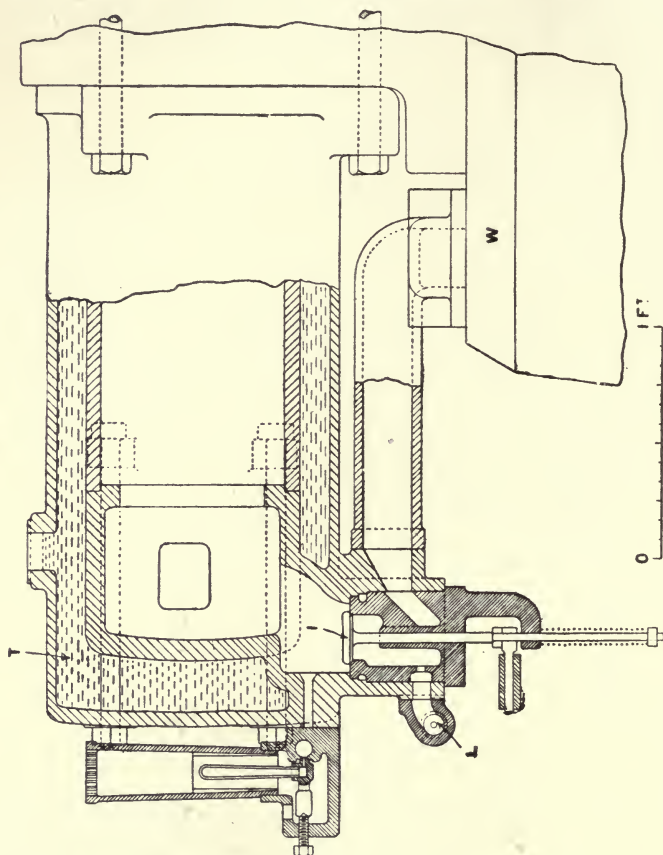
Crossley Otto Engine, 9 HP Nominal (vertical section, end).
